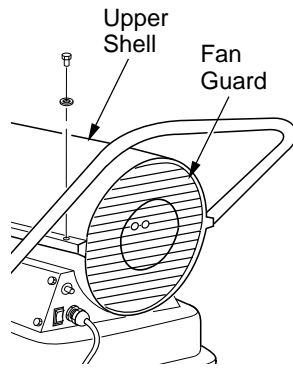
Upper Shell Removal, 100/150,000 Btu/Hr Models
